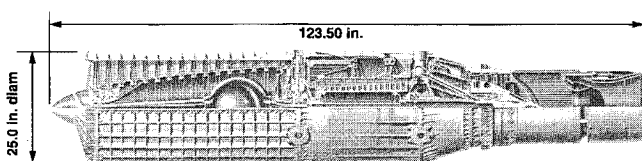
Cross section of L-1000 (XJ-37) turbojet engine with reheat (Ref. 9).
